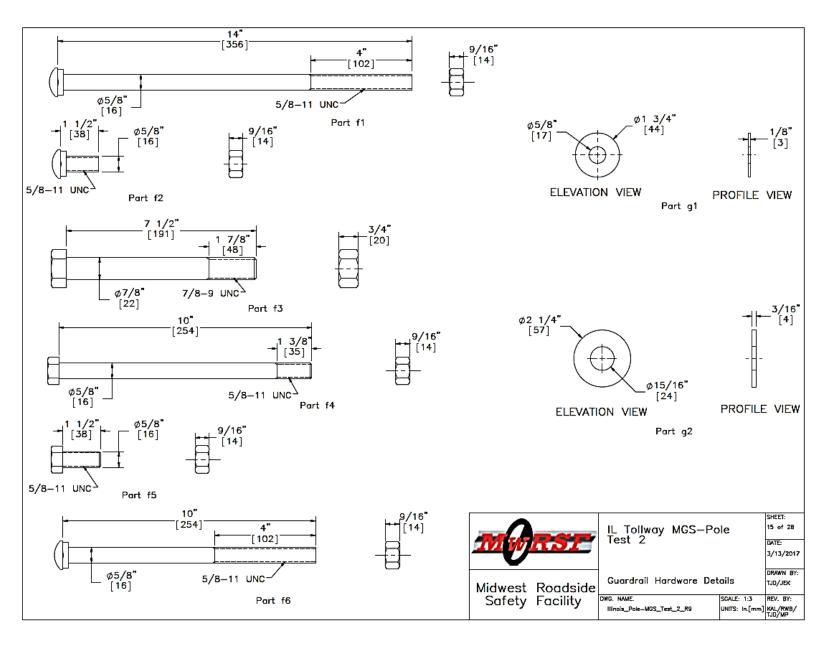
Guardrail Hardware Details, Test No. ILT-2
